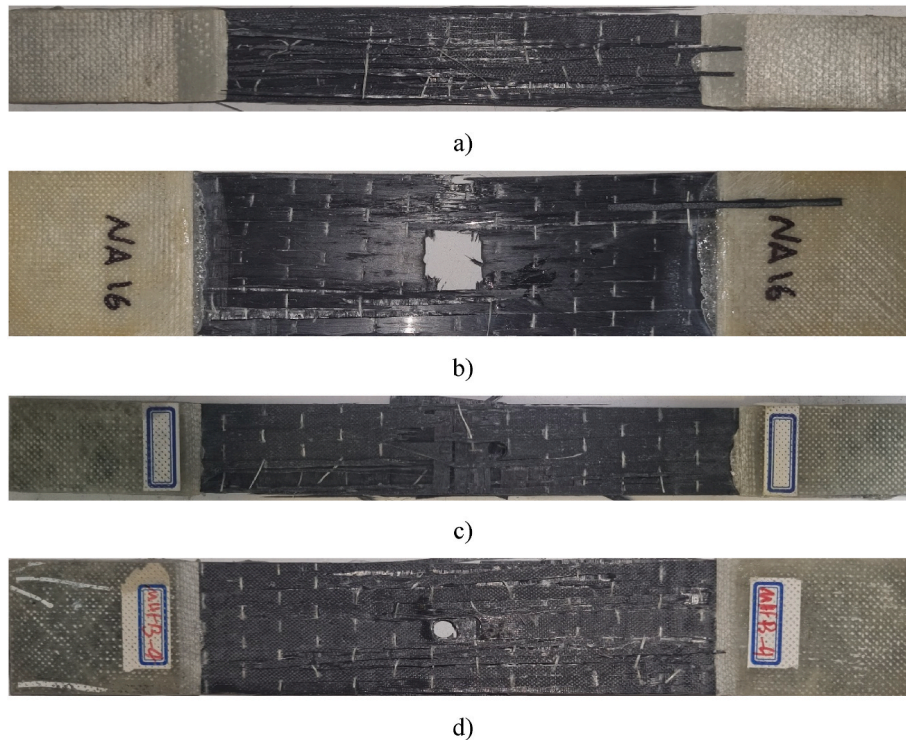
Specimens after fatigue failure in a fiber pull-out failure mode: (a) plain, (b) cracked (c) holed with  $\rho = 2.1$  mm and (d) holed with  $\rho = 3.25$  mm.
